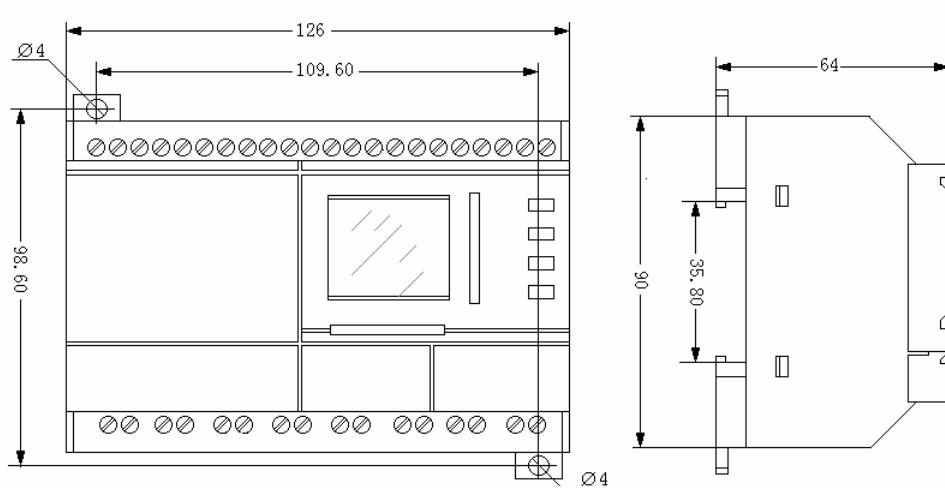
Installation Dimension of SPR-22 Series (mm)
